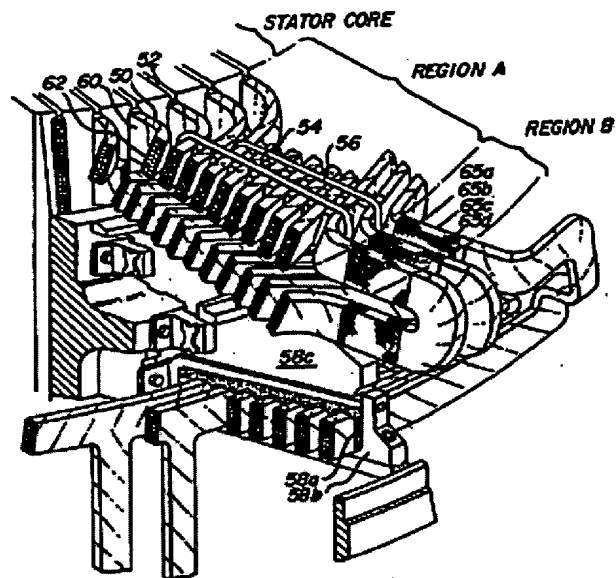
Machine Having Conventional Bar-Type Machine Windings
